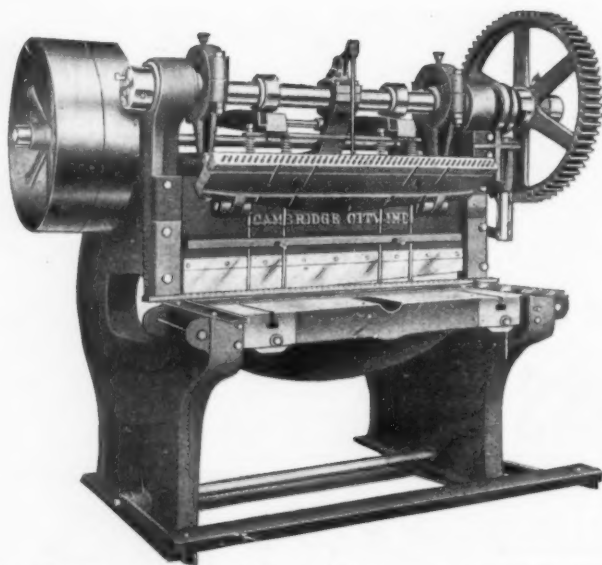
shows the punch-cross-head disengaged, thus converting the machine into a regular shear for shearing only.
